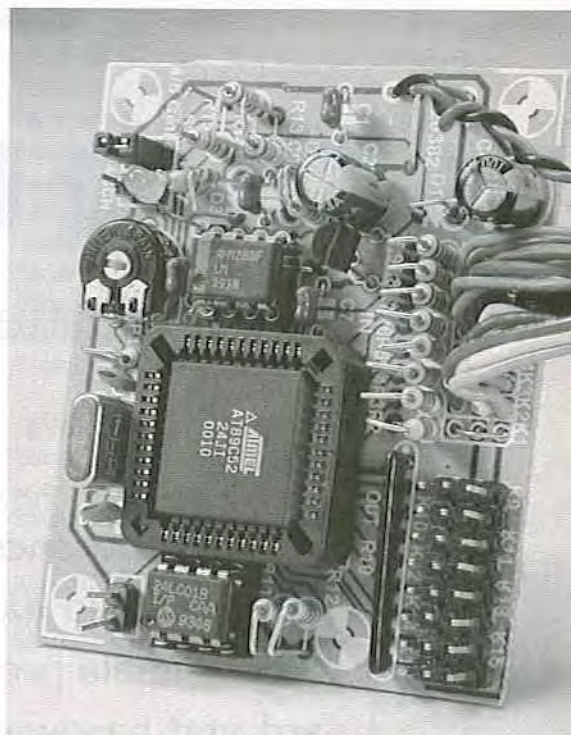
A close-up of our finished and tested prototype. As you can see, we soldered the servo wires directly to the board.
